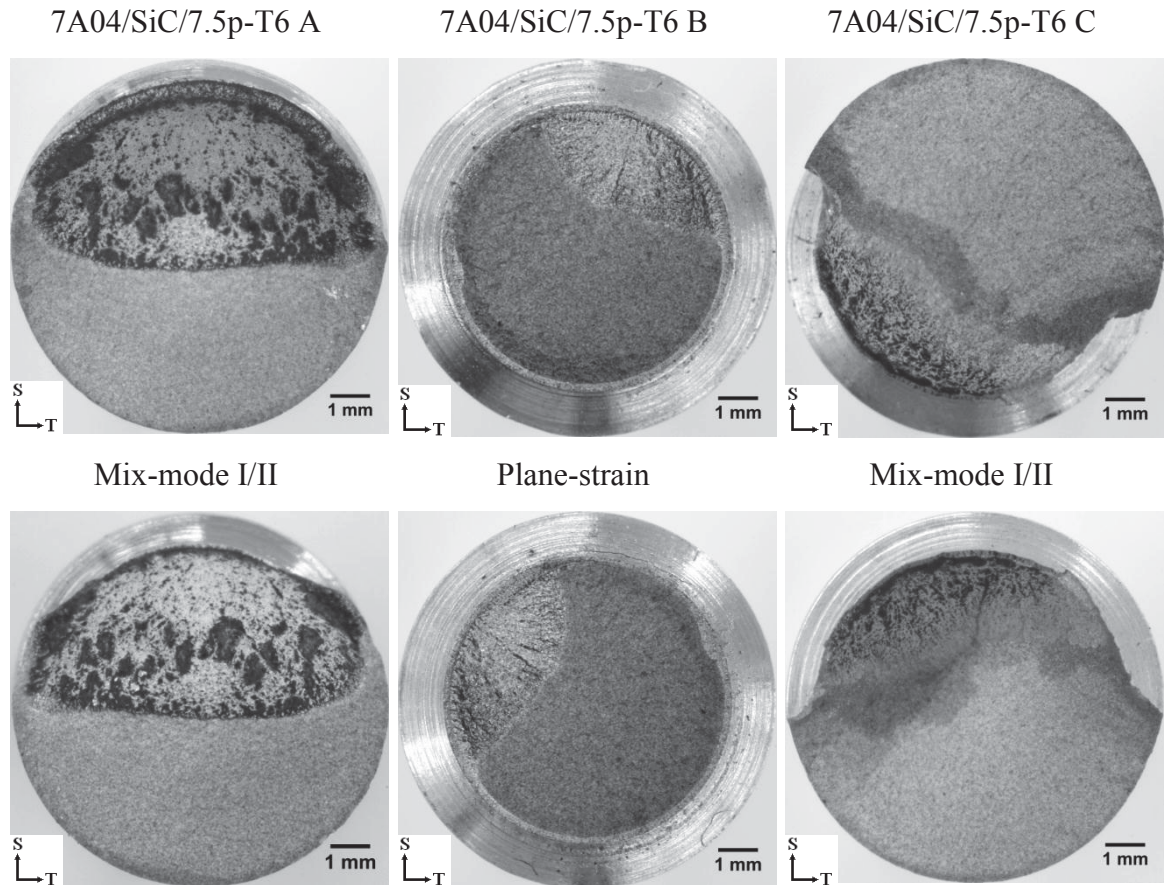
Circumferential notch tension precrack fracture surface for the 7A04/SiC/7.5p-T6 aluminium materials. The top and bottom fractographs for each column are the matching fracture halves for each specimen. The letters A, B and C are used in this section to designate the test specimens.
